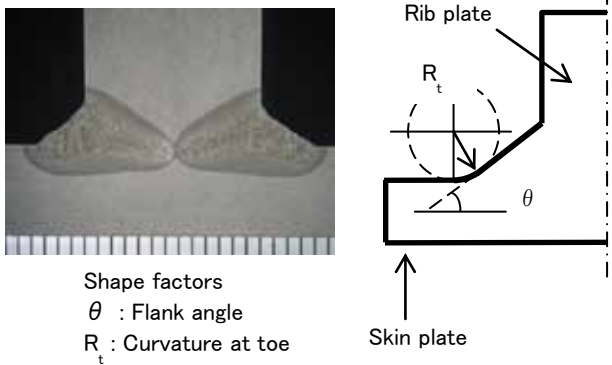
Macrograph of Laser arc welded joint and shape factor
